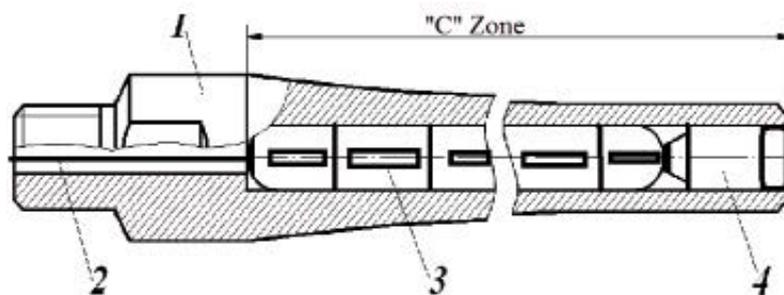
The CPR mill 75 mandrel with built-in high-speed vibrator: 1 - mandrel; 2 - a flexible shaft; 3 - high-speed vibrator; 4 - plug
